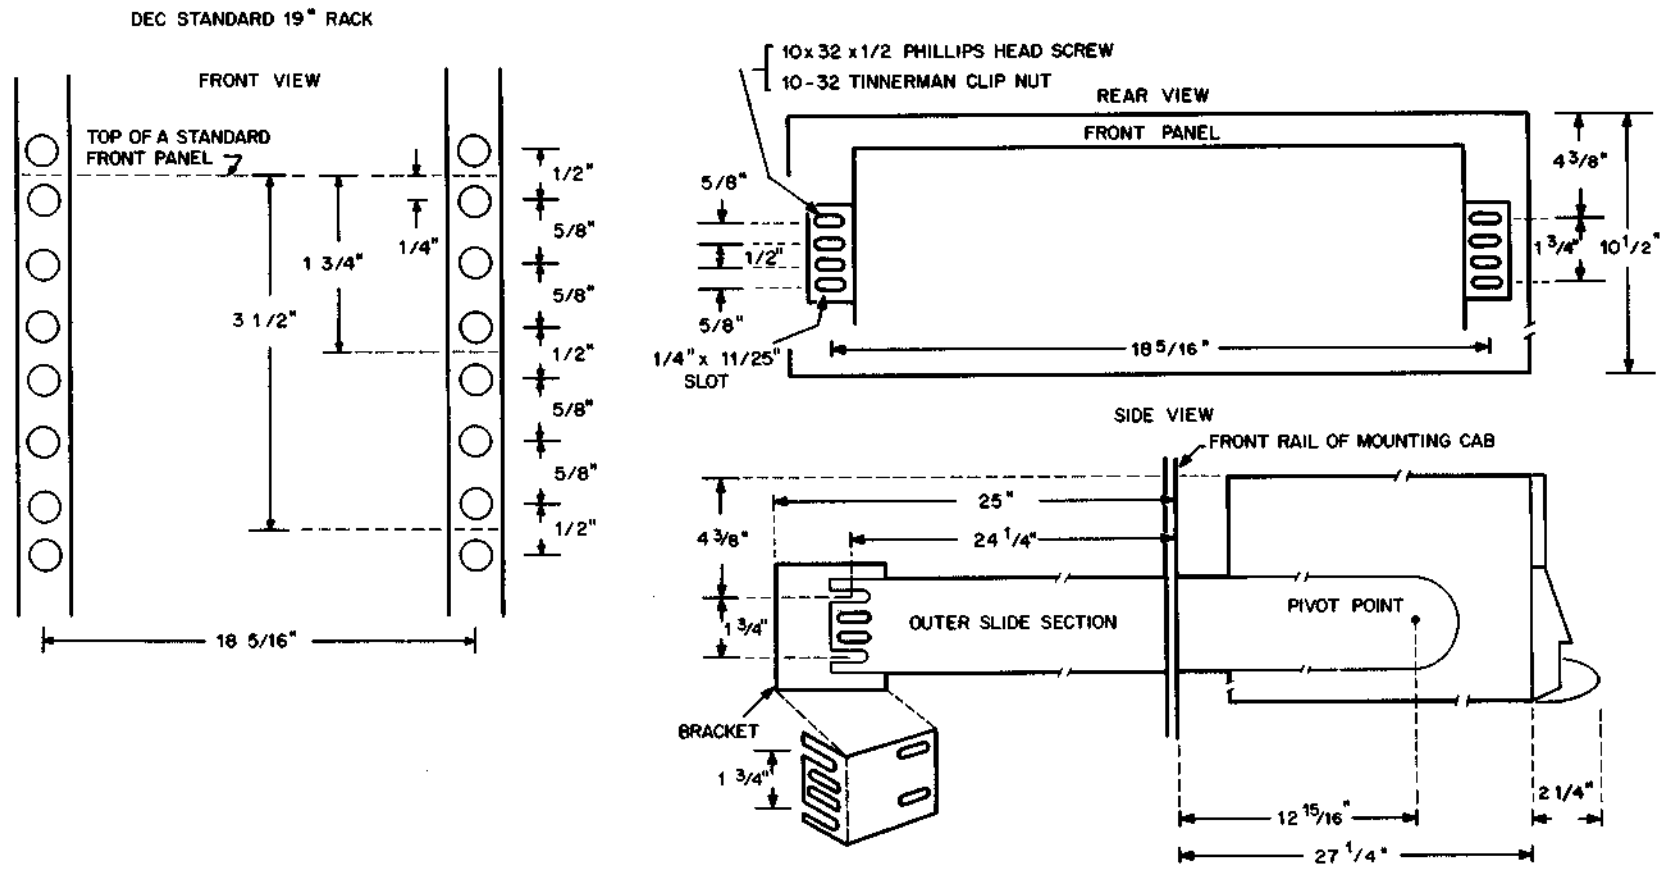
PDP-11/05/10-S and BA11-K Mounting Box Cabinet Mounting Specification
